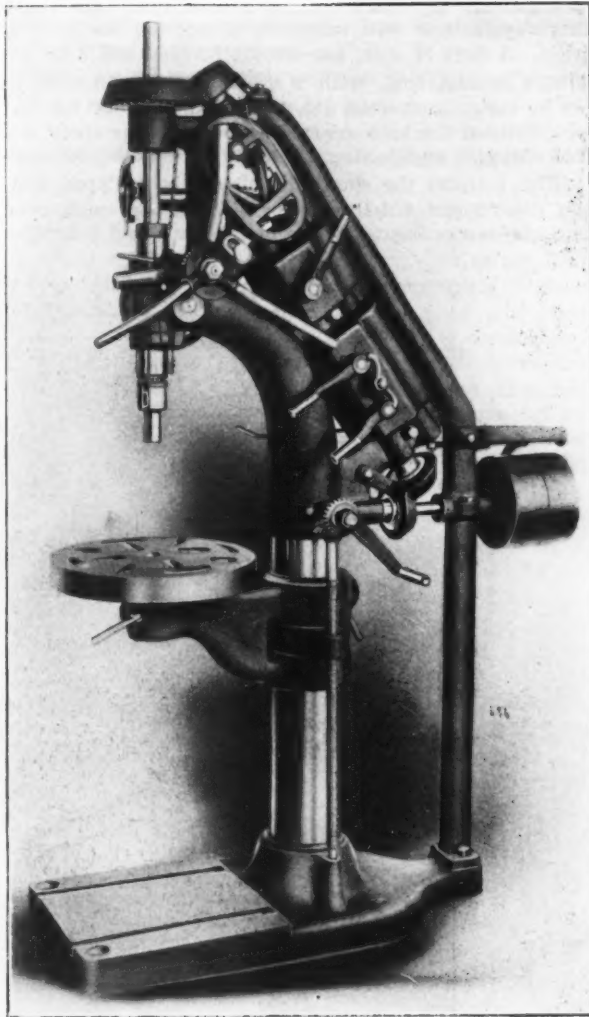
The New Upright Drill Built by the Barnes Drill Company, Rockford, Ill., with Complete Equipment.
